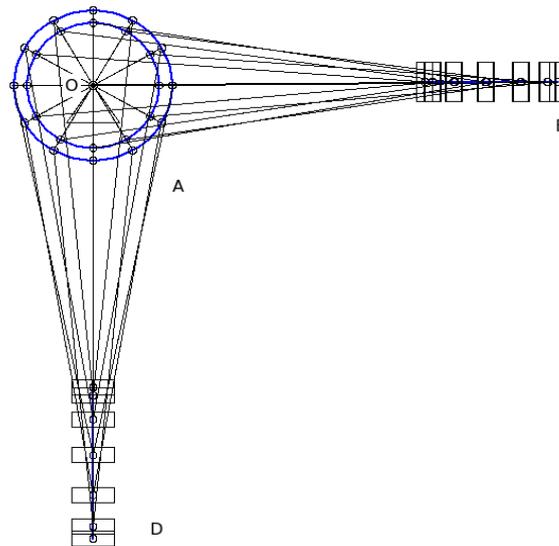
Kinematic chain of the main drive of the cold rolling mill
